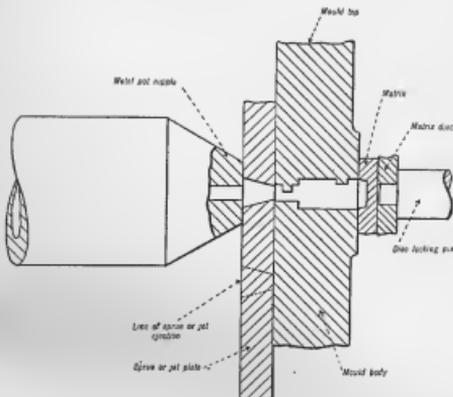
Oddur type-bar machine*. Section at the casting-point.
